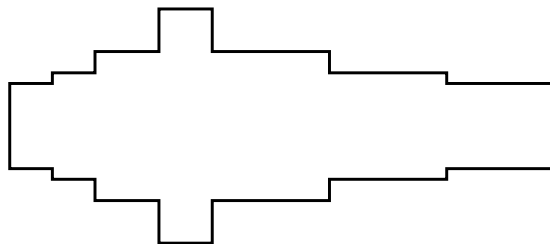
STEPPED GEAR SHAFT – SIDE VIEW
